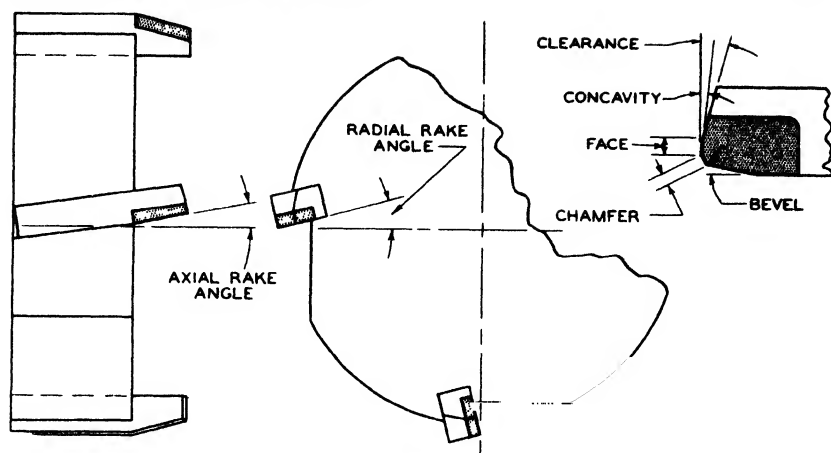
Nomenclature of the Inserted Blade (or Tooth) Milling Cutter
